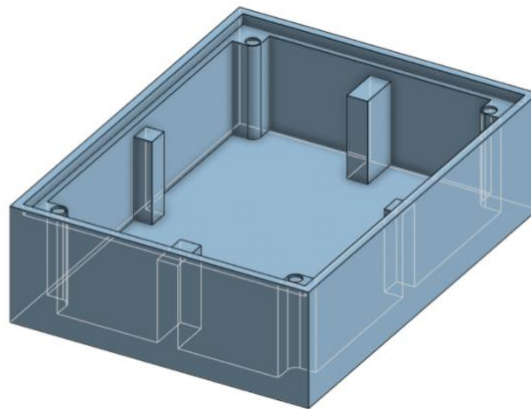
(RIGHT): PCB Mounting Box; Isometric view.
